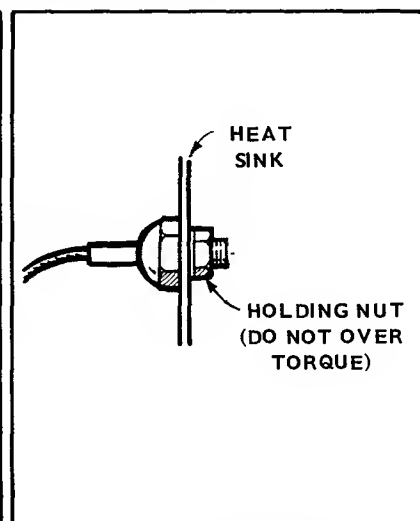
INSTALLING NEW RECTIFIERS
